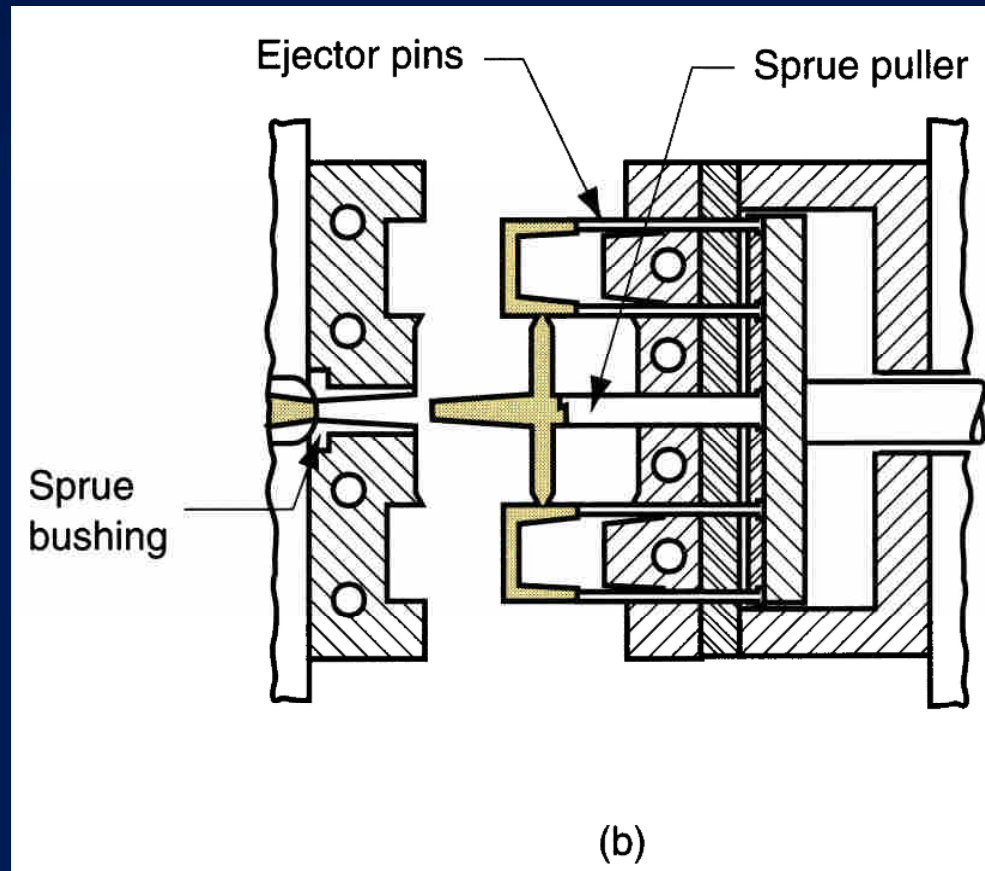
Details of a two-plate mold for thermoplastic injection molding: (b) open
